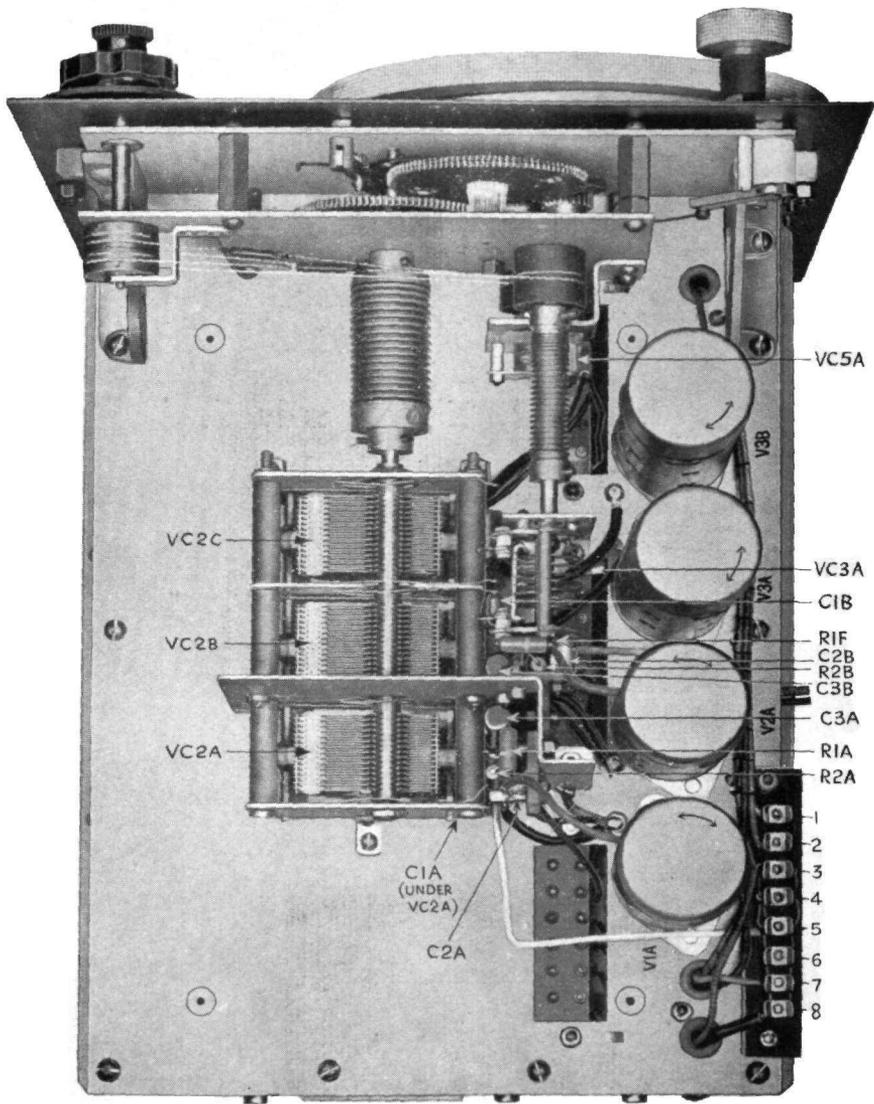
BOTTOM VIEW OF R.F. CHASSIS.
